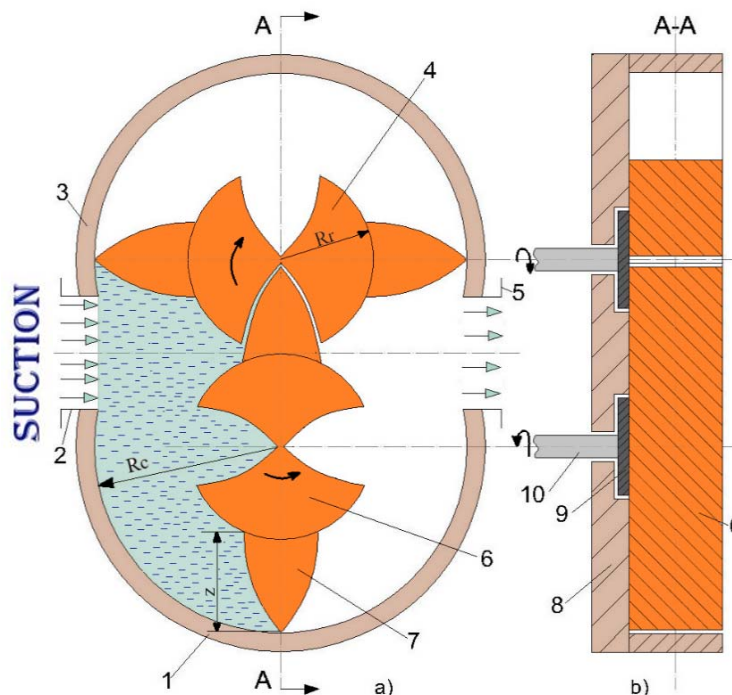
View (a) and longitudinal section (b) through the rotating machine
